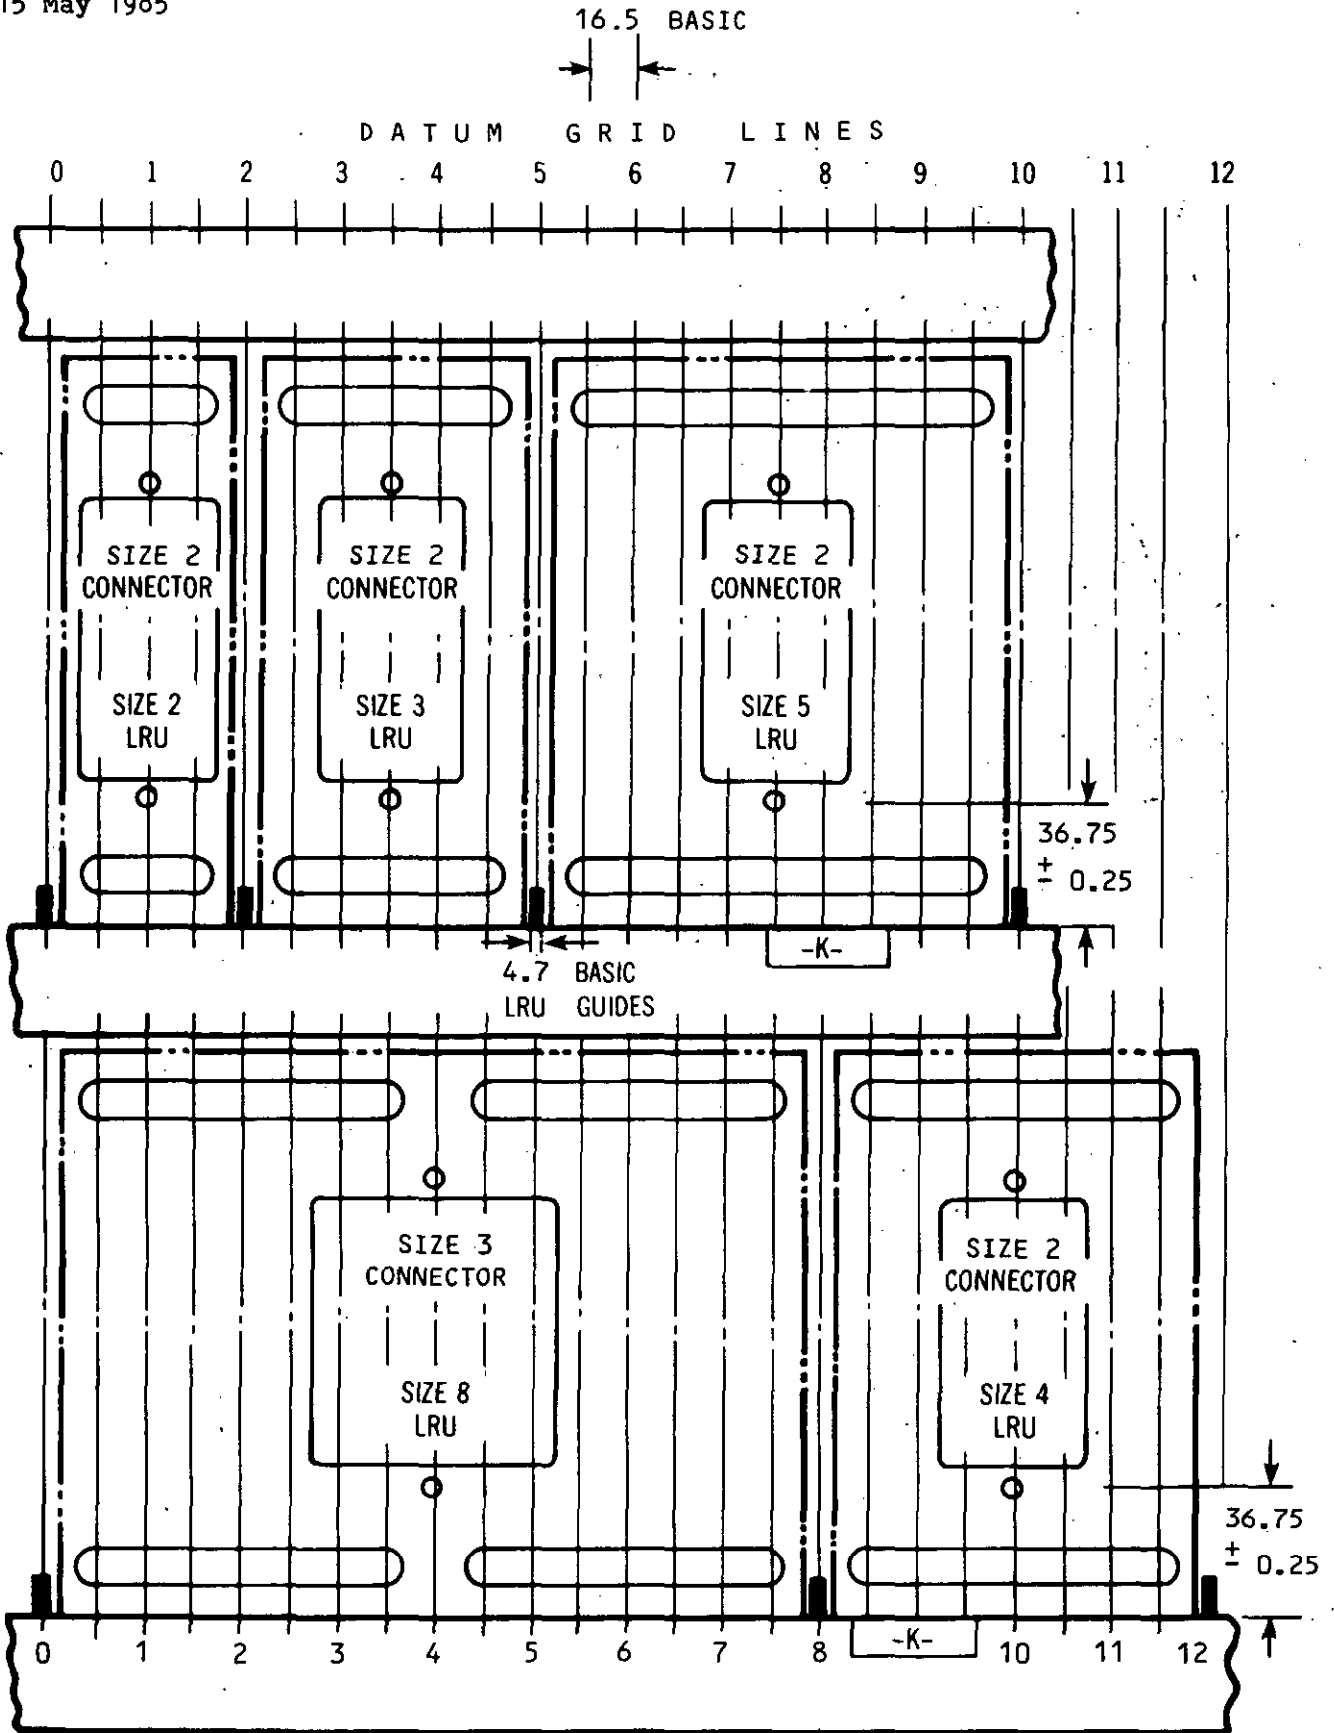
Standard shelf datum line grid and LRU location.
